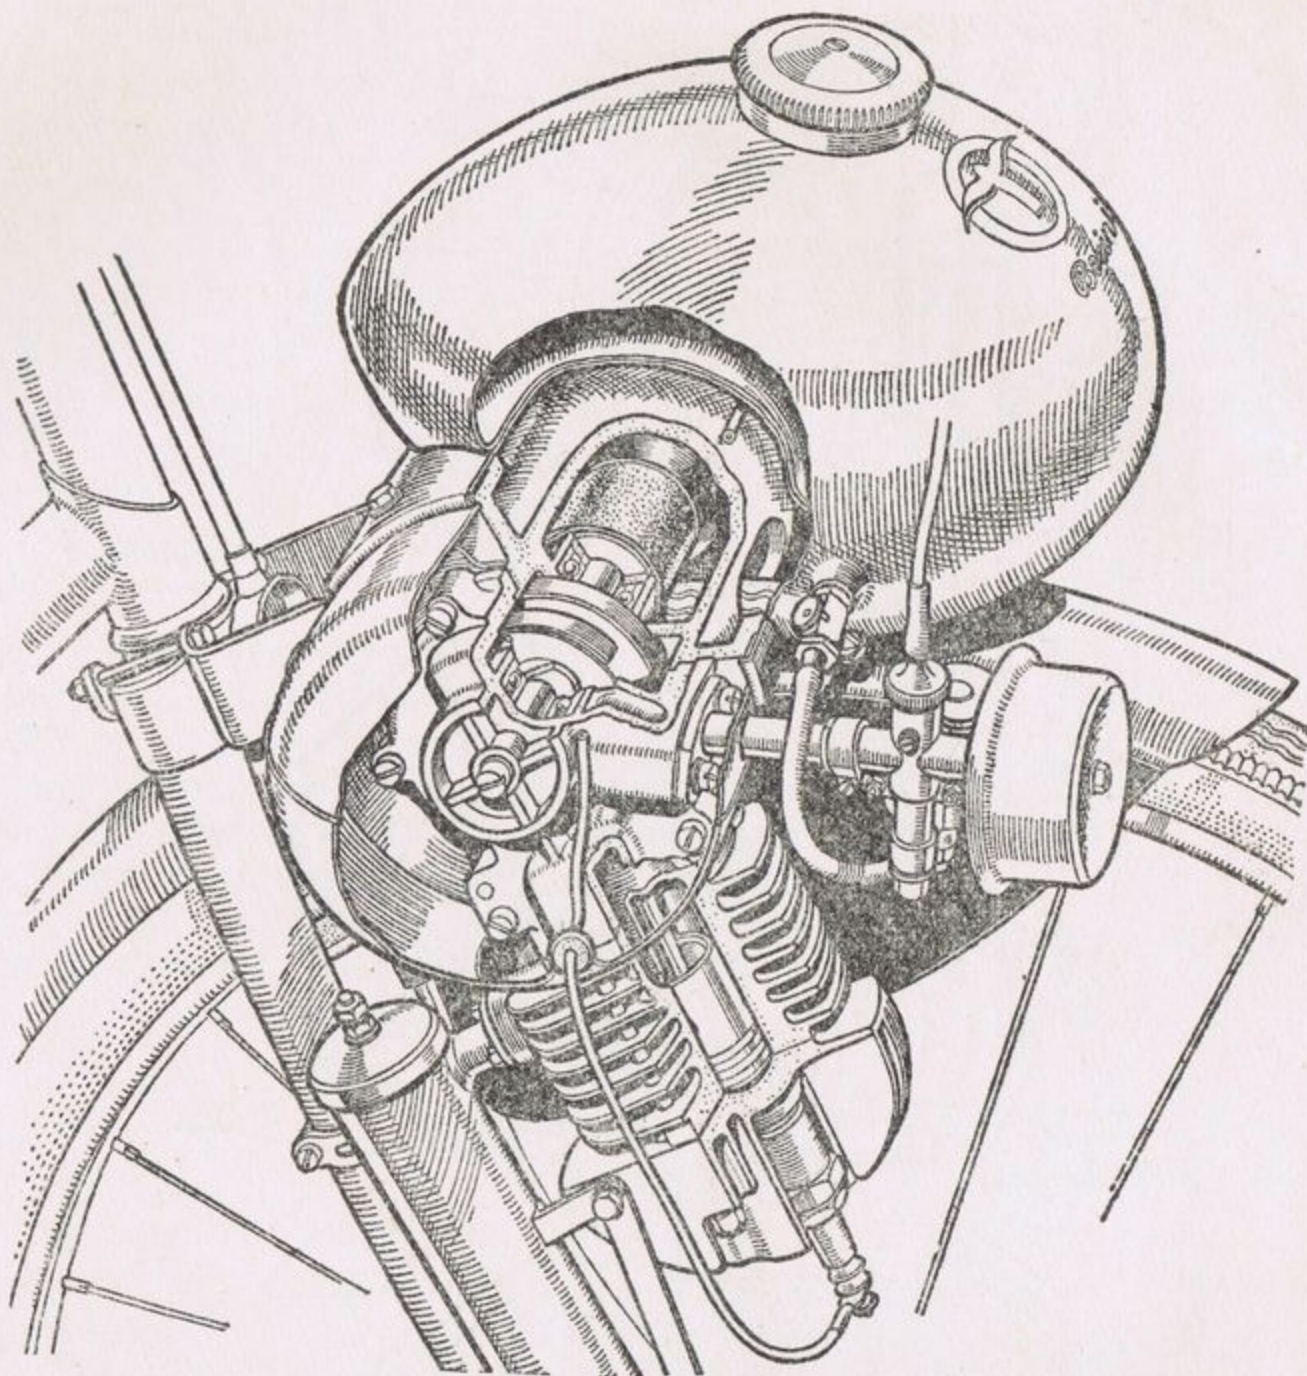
Another roller-drive, rear-mounted cycle-motor—the Standard model Power Pak. The engine unit is of 49 c.c. At the rear is a lifting handle. A drawing of the Synchronomatic Drive model appears on page 45
